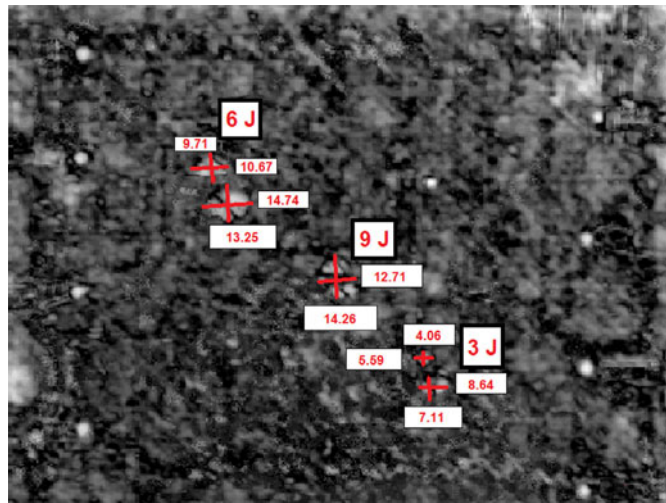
Ultrasonic C-Scan of the GFRP specimen (BVID dimensions given in millimeters).
